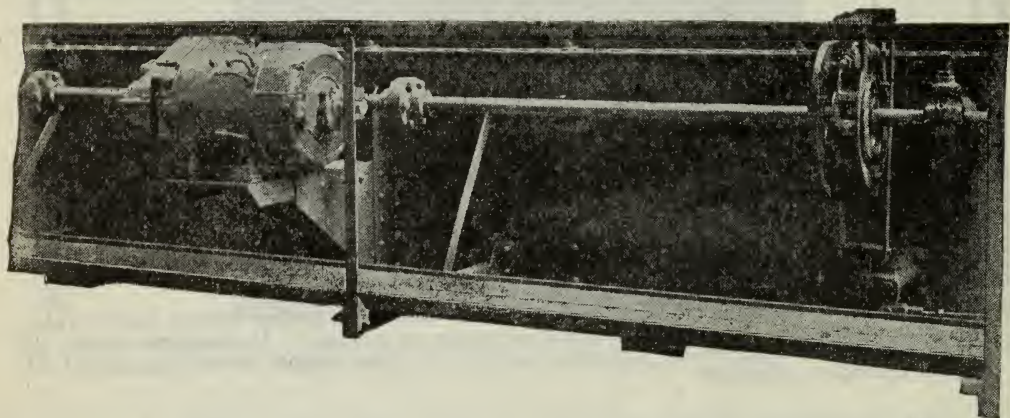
,218.—Niles crane construction: Bridge drive for box section girders. The web plates of the box section girders are reinforced by heavy stiffening angles, placed near the bridge drive motor and are connected by diaphragms, preventing distortion of the girders by motor or gears. The bridge motor is bolted in a horizontal position to a heavy structural steel bracket riveted to the girder. The motor gear and pinion are enclosed and run in self-oiling bearings. The cross shaft is of extra heavy steel and is sufficiently strong to skid the truck wheels with the crane fully loaded, thereby preventing distortion in the shaft due to careless handling. The shaft is supported at uniform intervals by adjustable split babbitted bearings which can be removed without disturbing any other part. They have oil reservoirs and are provided with wick feed lubrication. The truck wheels are extra heavy with double flanges, the treads being accurately machined or ground to equal diameters. A powerful foot brake of the post type is provided, operated by a foot lever conveniently located in the cage. The brake is simple in construction and extremely powerful in action. A substantial platform with angle iron hand rail extends along the girder on the bridge drive side, providing easy access to the bridge motor, gears and bearings.
